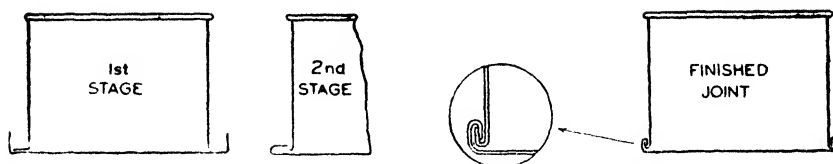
KNOCKED-UP BOTTOM JOINT
